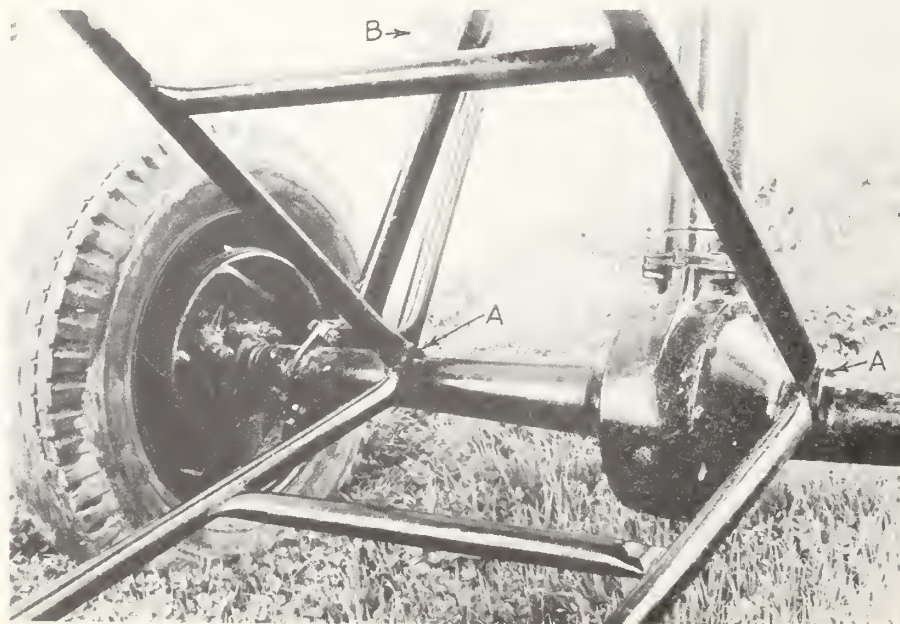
Braces attached to the rear axle. A, Anchor lugs welded on the rear-axle housing to attach chute and platform braces. B, Rear spreader-bar bracket on radius rod.
